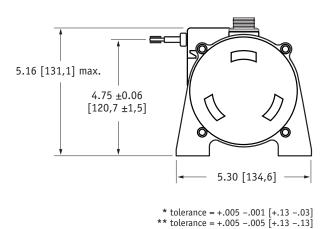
Outline Drawing (36 oz. cable tension only)
